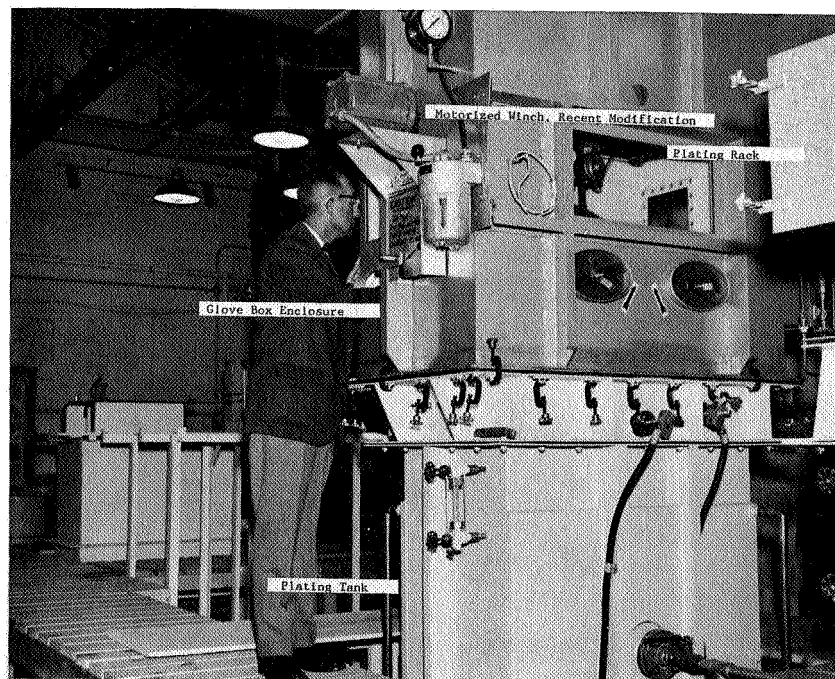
The glove box enclosure with plating rack inside positioned over plating tank. The motorized drive mechanism was utilized to lower the plating rack into position in the tank.
